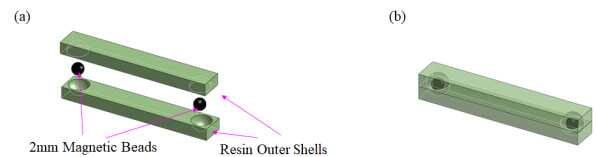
(a) Exploded view and (b) fabricated cuboid robot.
